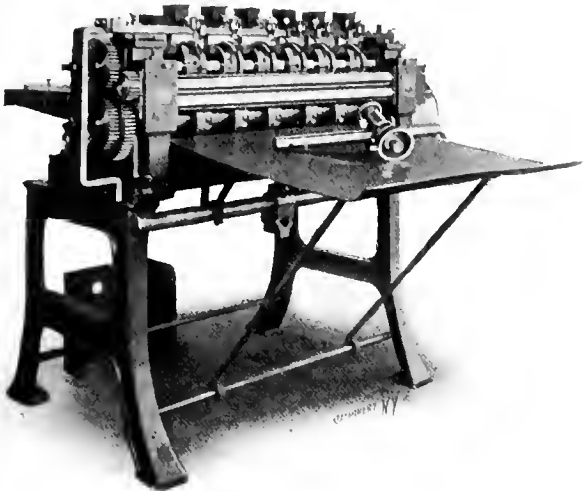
Slitting Rolls with Double Cutting Edges and Self-contained Grinding Attachment
